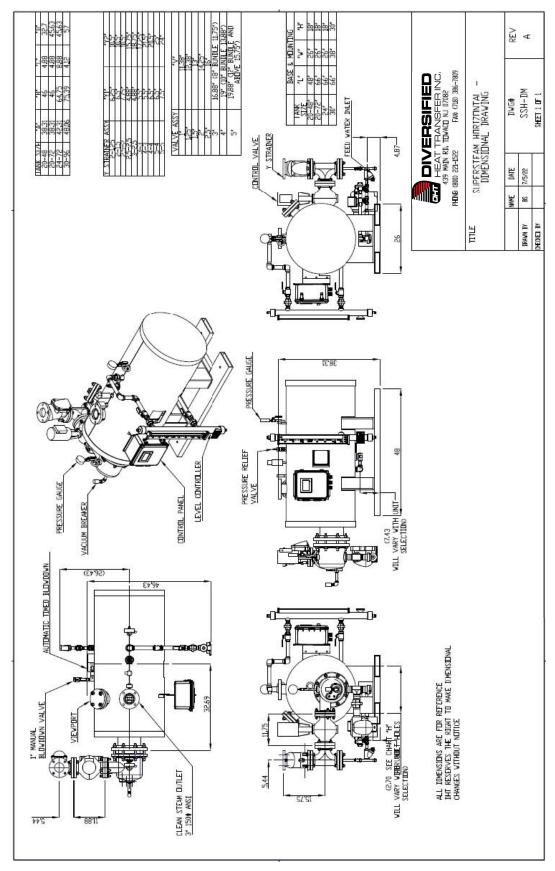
SS SERIES HORIZONTAL UNITS DIMENSIONAL DRAWING
